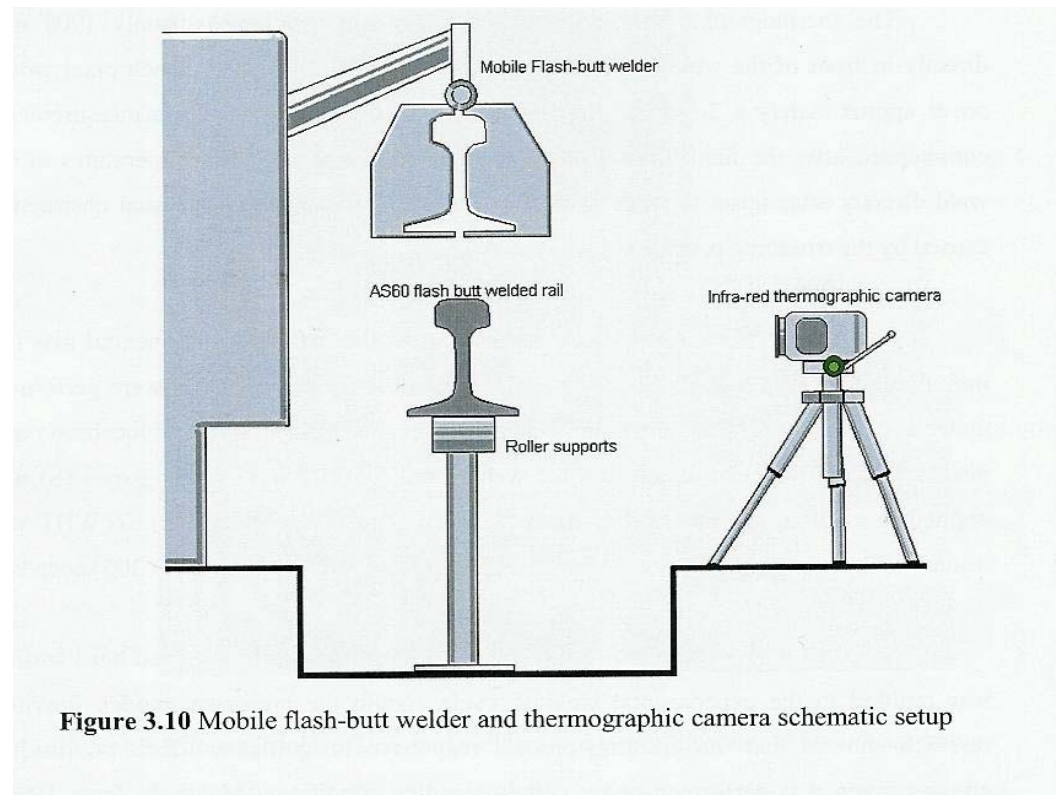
Mobile flash-butt welder and thermographic camera schematic setup
